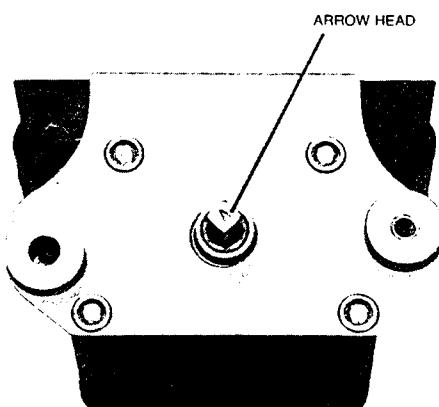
AUXILIARY SWITCH—CRANK SHAFT POSITION
